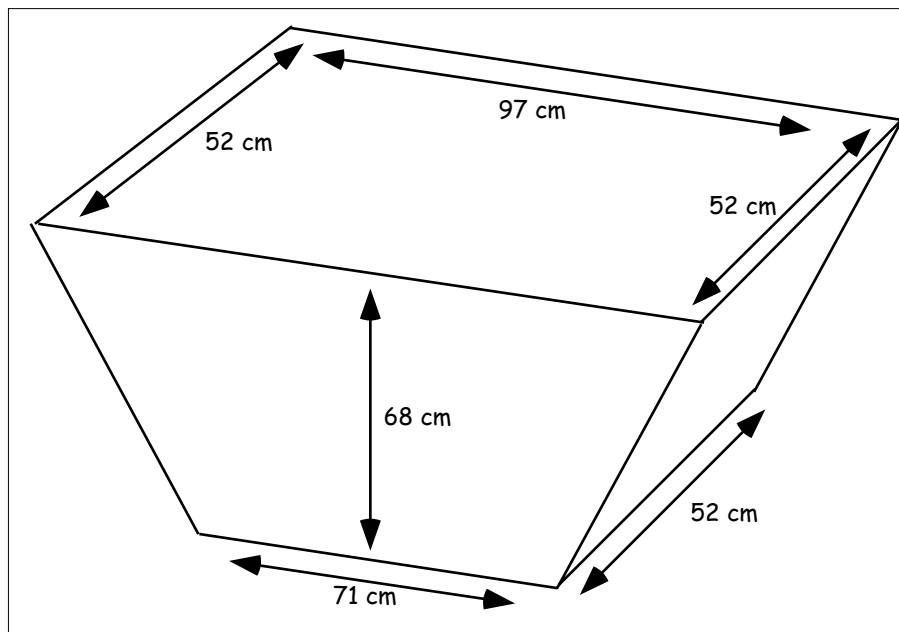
Fuel tank on F/V Tekokona II showing dimensions
